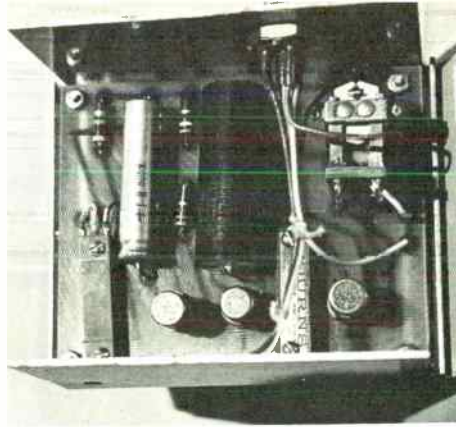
Completed sensor timer built on KOMO-TV printed circuit board. Stopping relay is in upper right corner of board.
